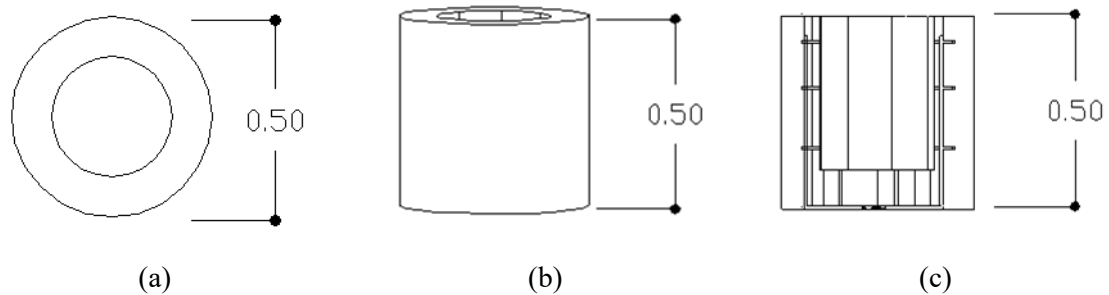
a) Front View of Seabin, b) Top View of Seabin, c) Section A-A.
